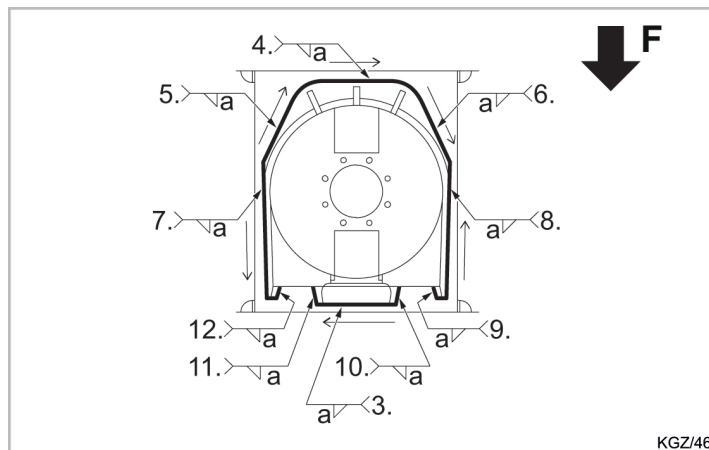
Welding sequence for mounting flange of KKS-I kingpin (view from above)
